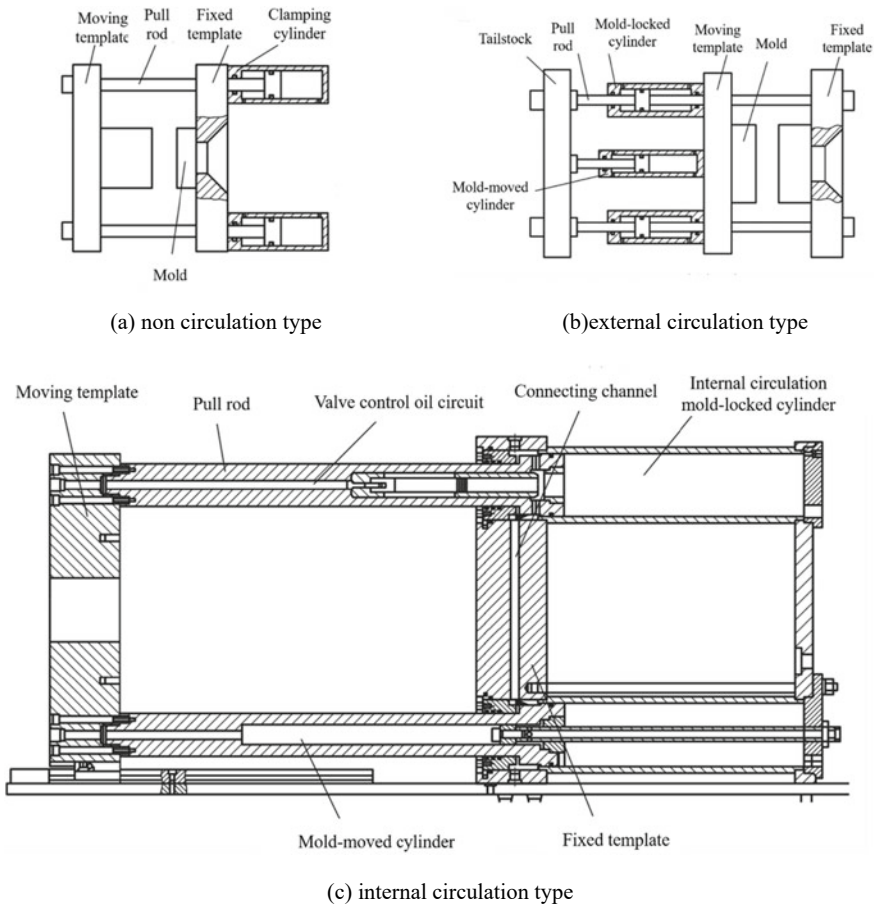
Hydraulic clamping mechanism of two direct compression plate
